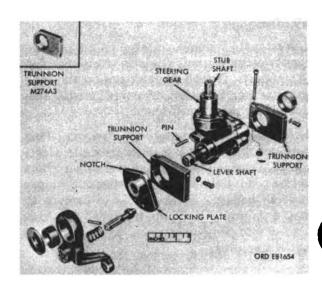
Steering gear, trunnions, and locking plate, as removed from vehicle—exploded view.
